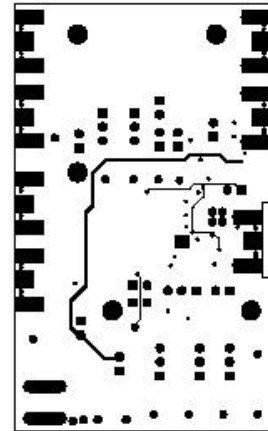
MAX3795 EV Kit PC Board Layout—Solder Side
